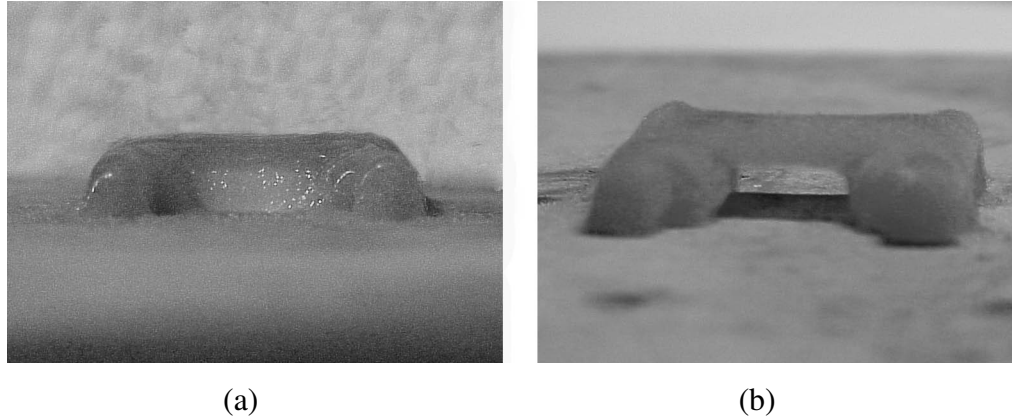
A fabricated ice part with a supported center section: (a) before support material removal and (b) after support material removal
